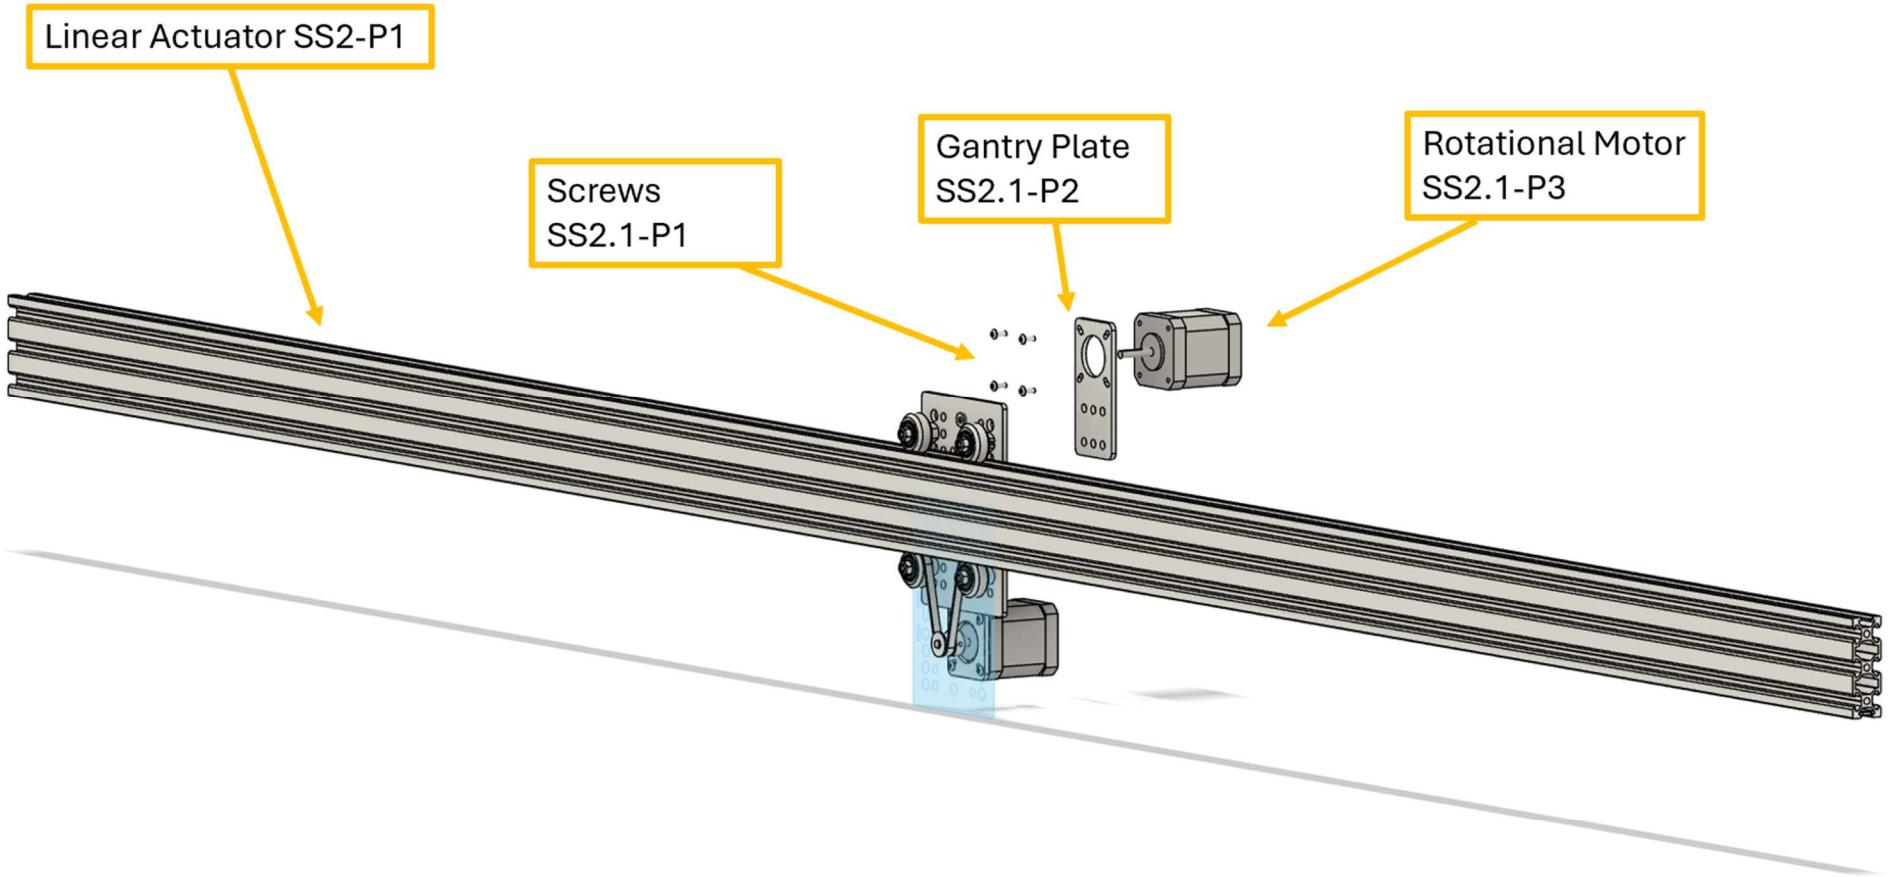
Exploded View Assembly Drawing of Sub-System SS# 2.1-The Linear Actuator
